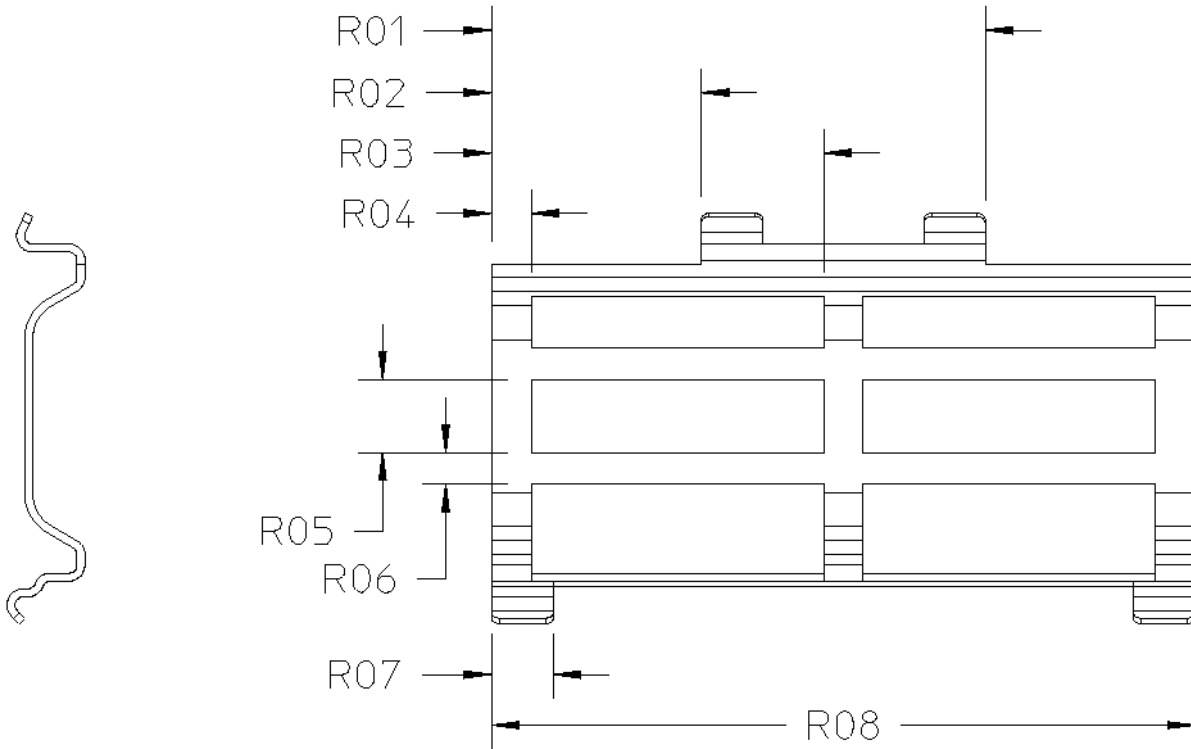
CAGE HEAT SINK ATTACHMENT CLIP
